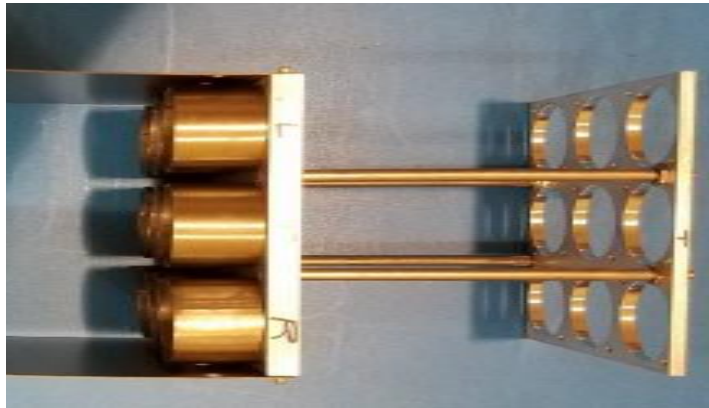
View of the spacers installed in flange 2, inspect overall height of all 9 tubes and check to see if they are canted from bad seating or gluing
